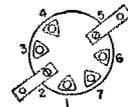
Metal strips on ARC-5 sockets permit easy mounting on other surfaces.
